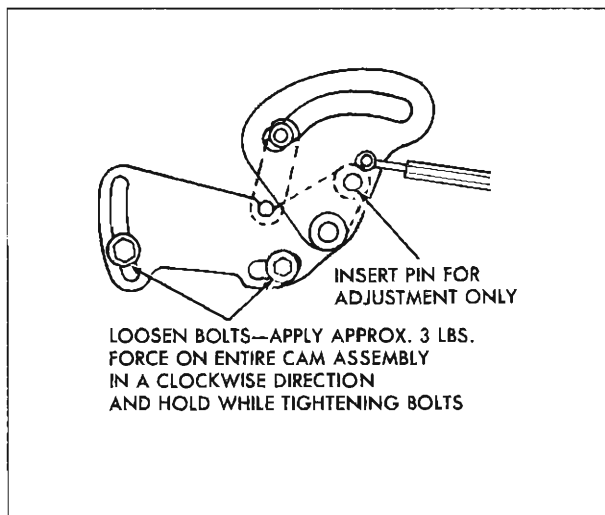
Temp Door Cam Adjustment (Chevelle)
